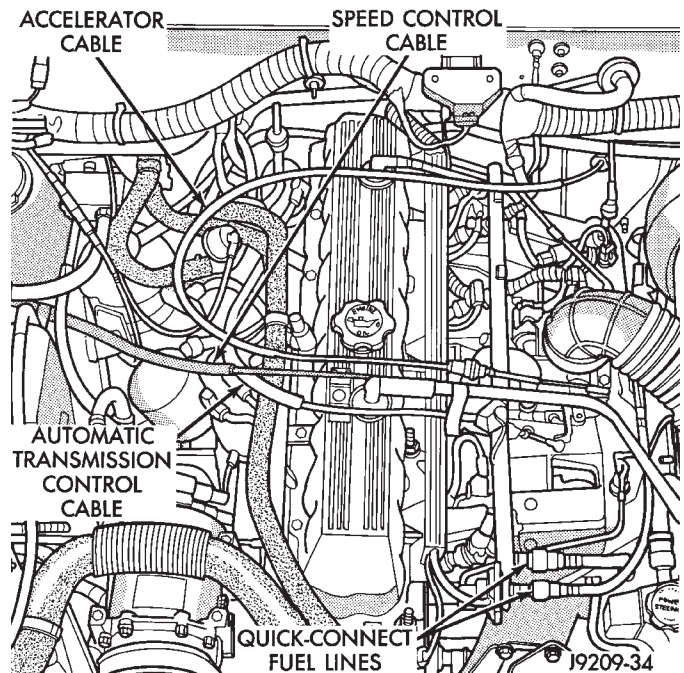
Accelerator Cable, Speed Control Cable, Automatic Transmission Control Cable & Quick-Connect Fuel Lines
